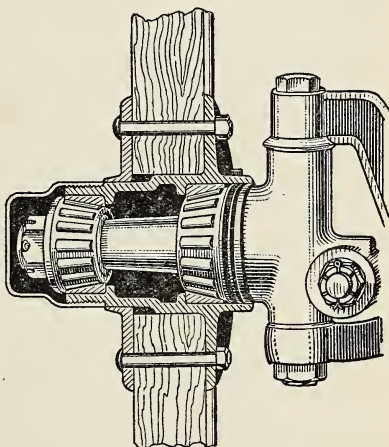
Front wheel of an automobile equipped with tapered roller bearings.
